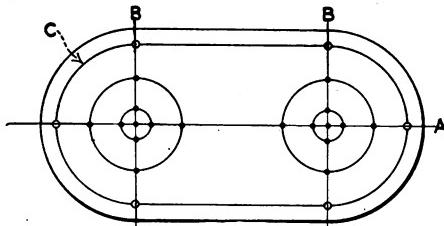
How marking is done for the drilling of large holes with a twist drill
